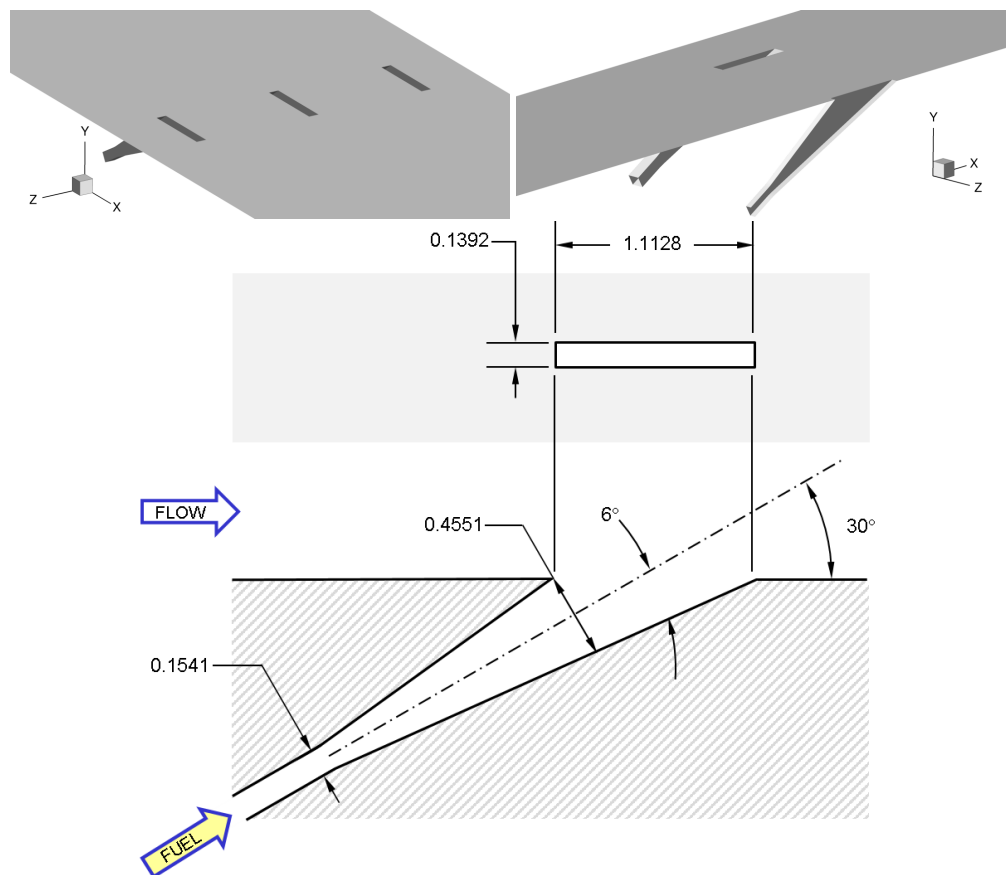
Isometric views and dimensional details of the baseline ramp injector. Dimensions are in inches.
